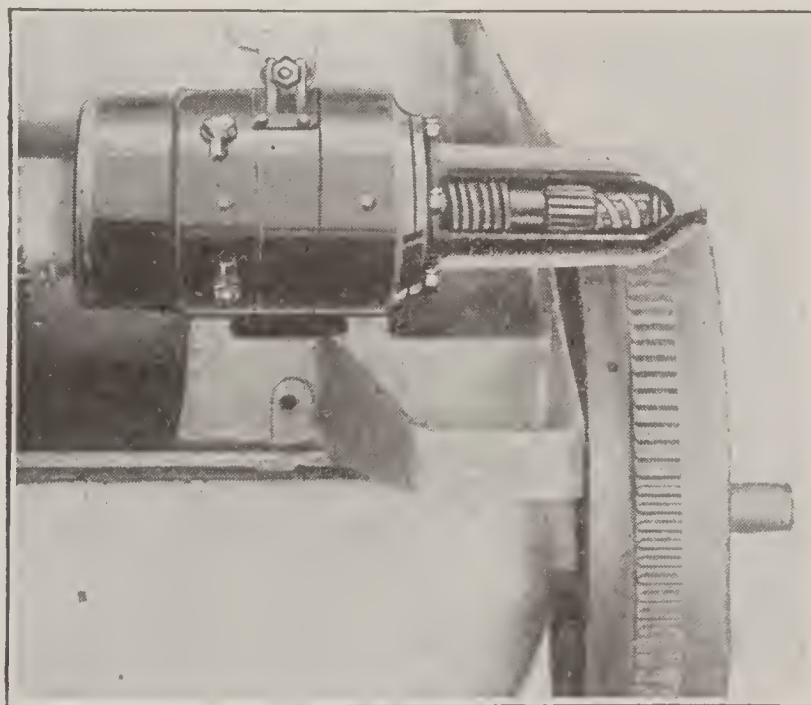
Auto-Lite Starting Motor with Bendix Drive
